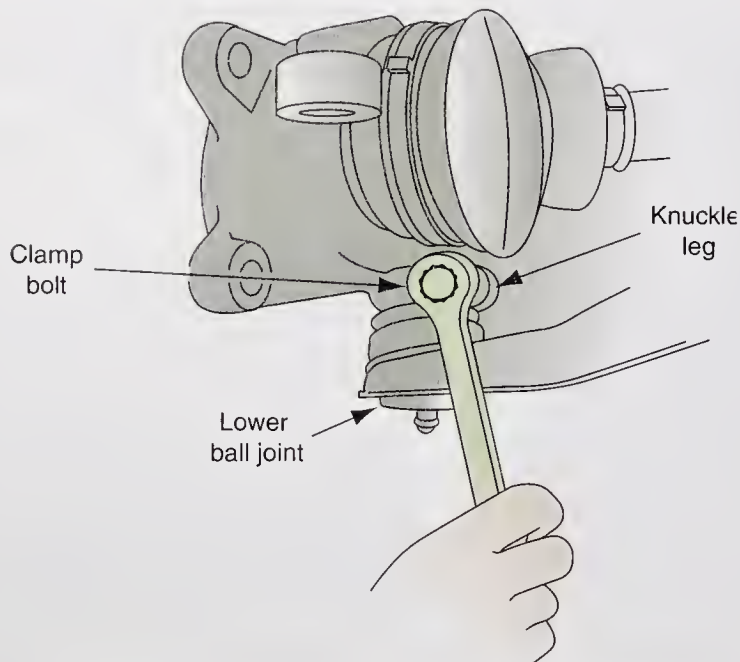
Removal of ball joint to steering knuckle clamp bolt.
